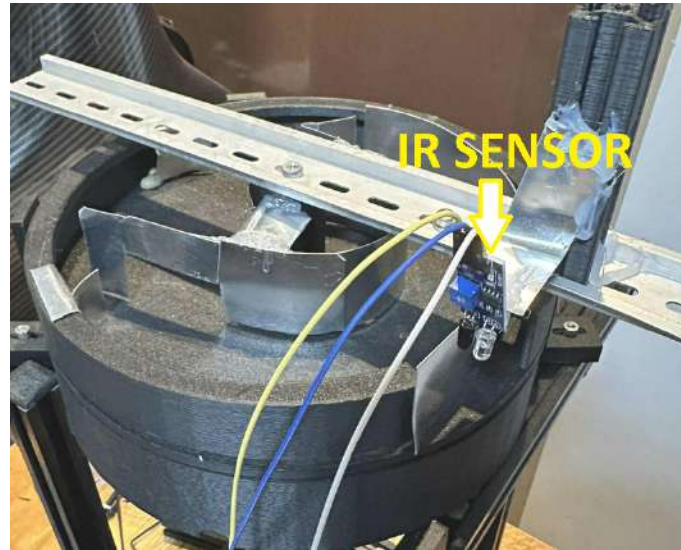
Rotating Conveyor Table with IR Sensor
